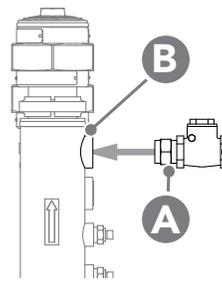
Modular DLV check valve and nipple assembly (A) and coolant tank outlet (B).
